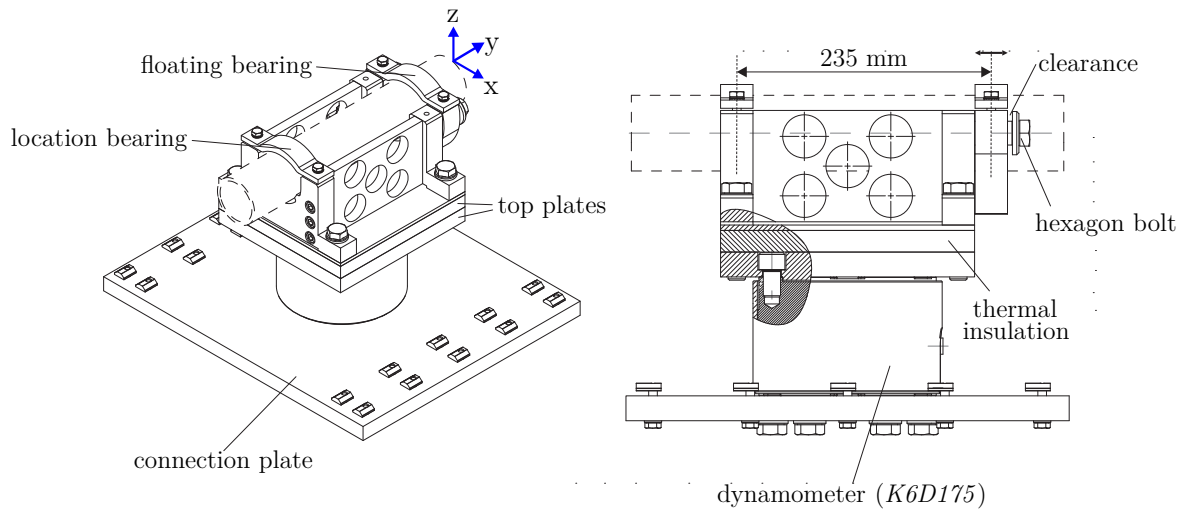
Isometric view (left) and side view (right) of the dynamometer and the pipe bearing assembly
